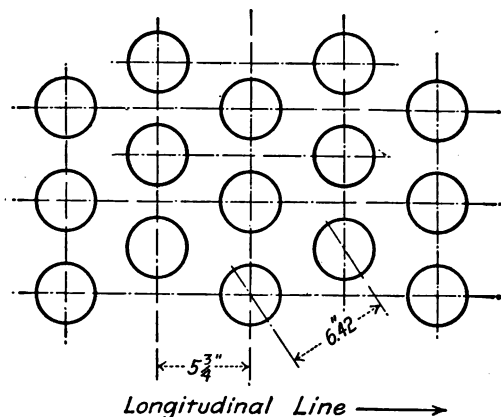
EXAMPLE OF TUBE SPACING WITH TUBE HOLES ON DIAGONAL
